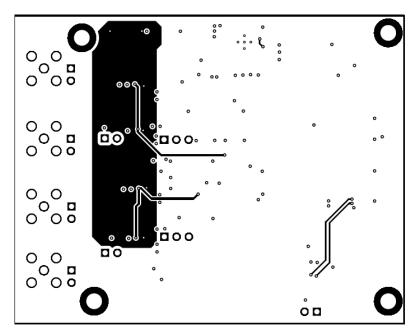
ADS8353-Q1EVM PCB Layer 4: Bottom Layer
